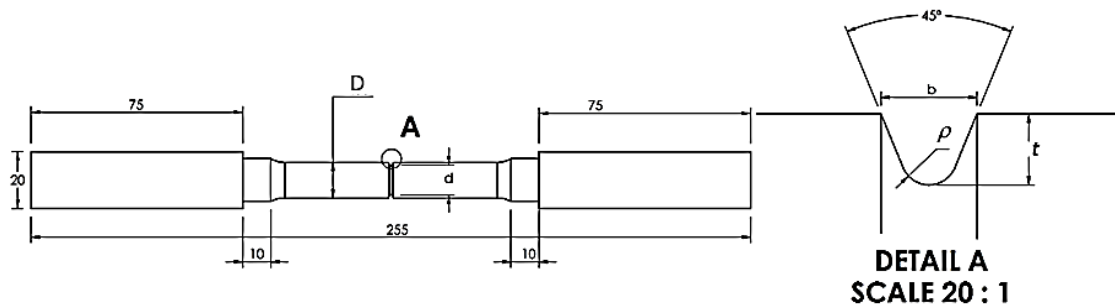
Geometry and dimensions of the NRB specimens in mm
